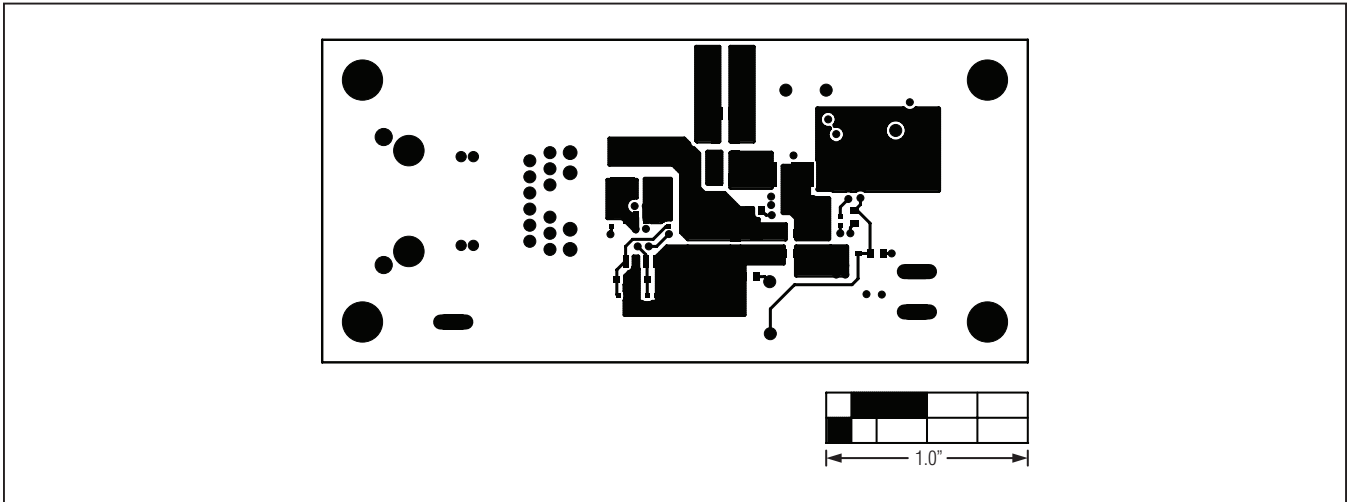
MAX5986A EV Kit PCB Layout—Solder Side
